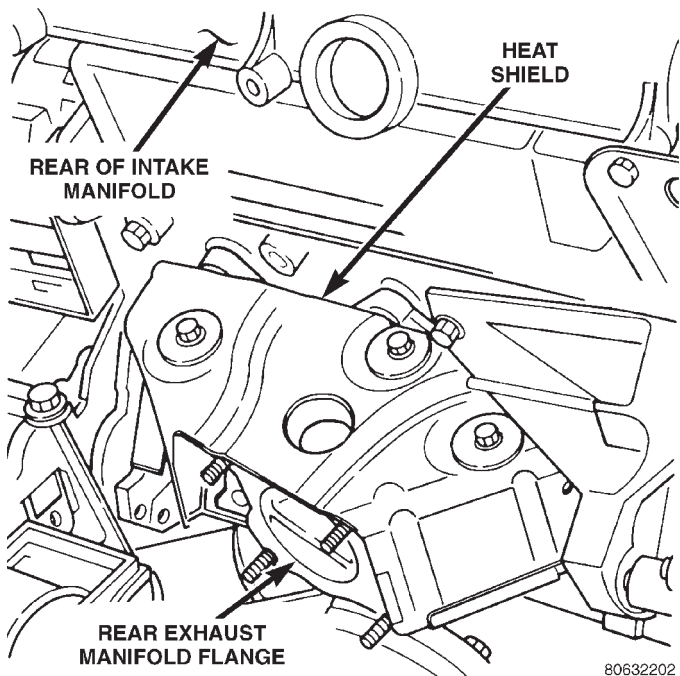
Rear Exhaust Manifold—2.5L Engine
